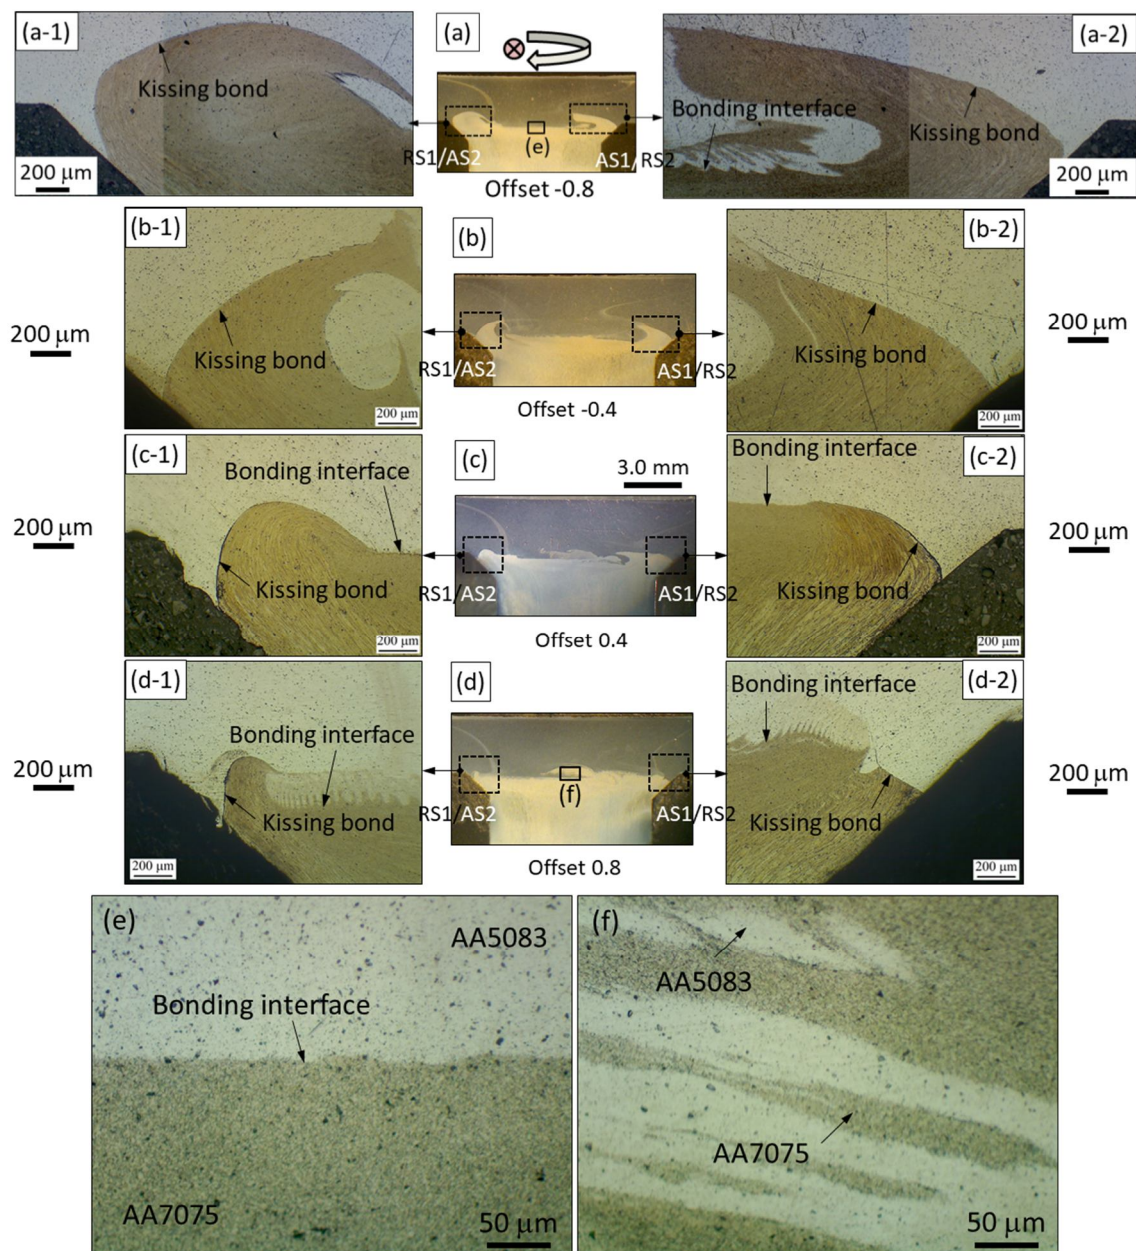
(a-d) Macro- and (e,f) micro-structures of welding interface produced under various distances of tool offsets.
